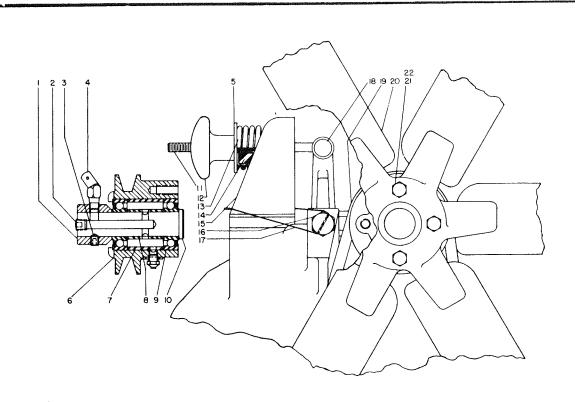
FAN SUPPORT ASSEMBLY PARTS FOR MODEL "B-1" AND "D-1" UNITS
